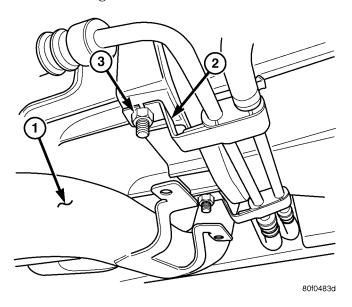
INNER COOLER LOWER TUBE MOUNTING - 2.4L TURBO
